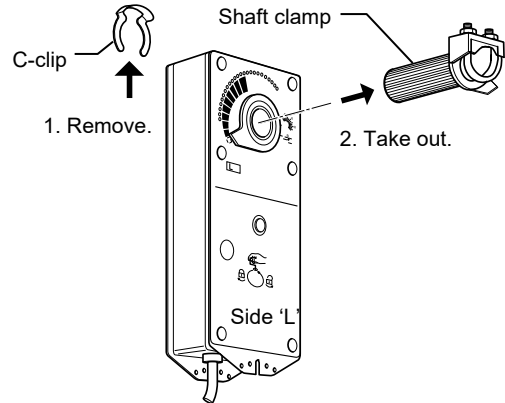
Installation of the actuator with reverse rotation to min. 95 mm long shaft (1)
